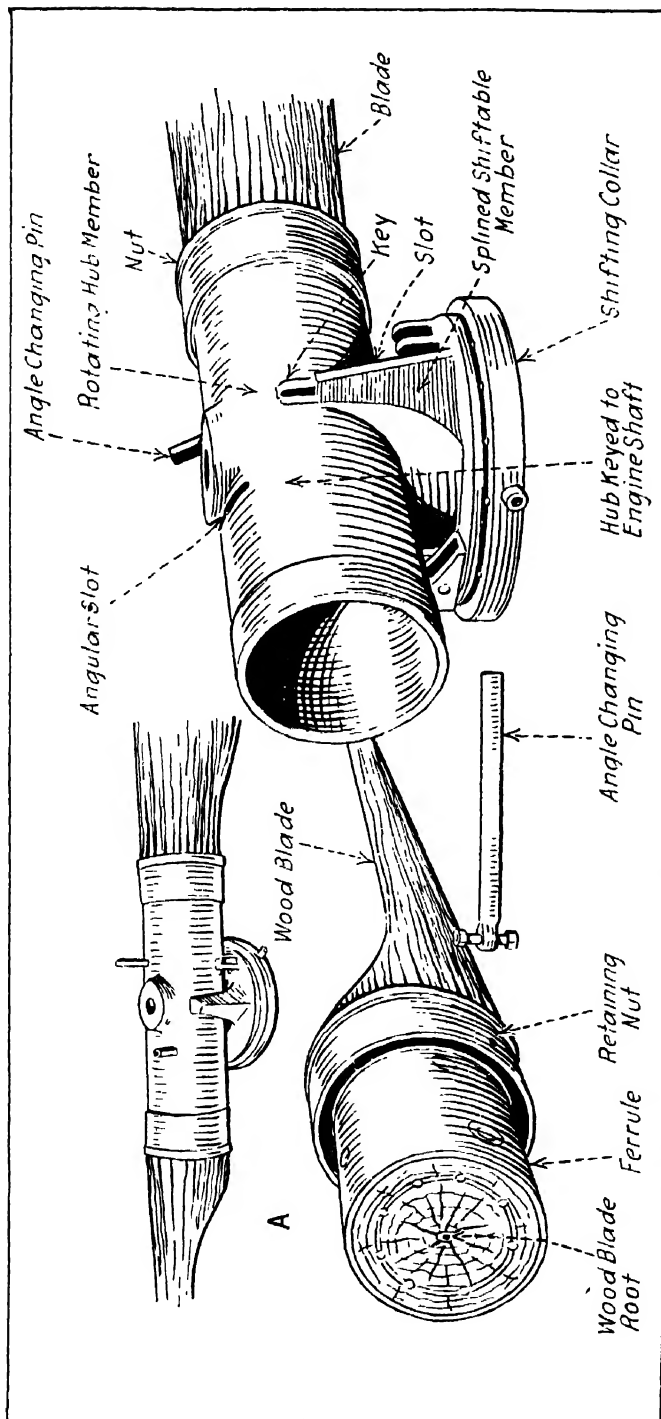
Blade Changing Mechanism of Hart and Eustis Variable Blade Propeller.
